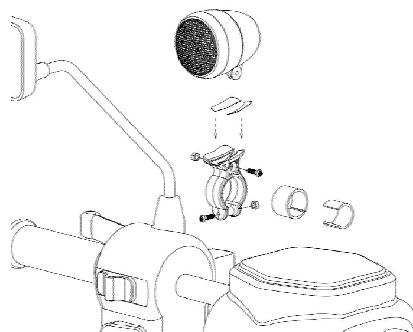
Overall demonstration of loudspeaker assembly process. The same installation is not limited to just handlebar.
